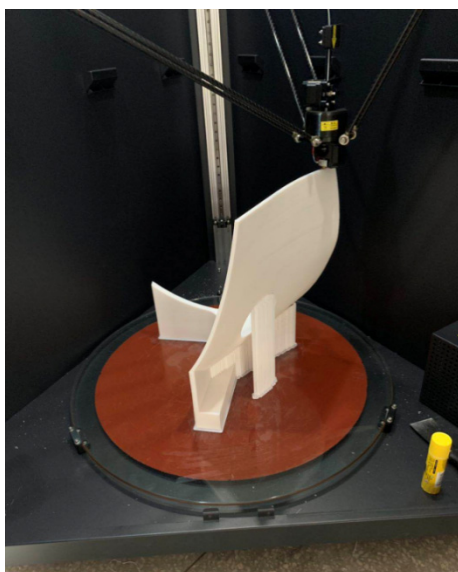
3D printer to fabricate real scale vacuum chamber model
